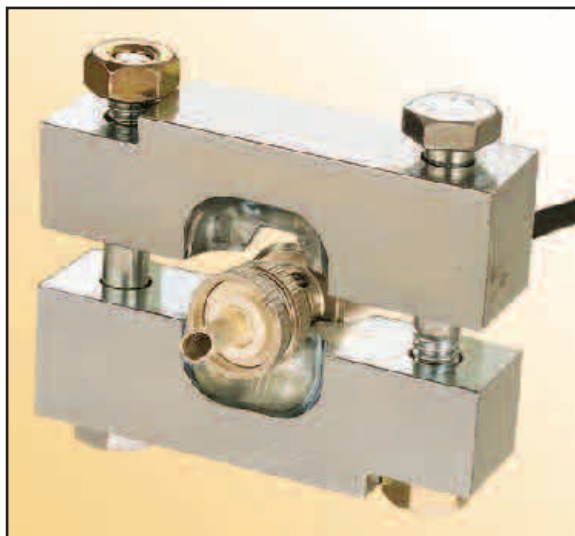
The K4AVU Coax Crimper ready to clamp down on a PL-259.
